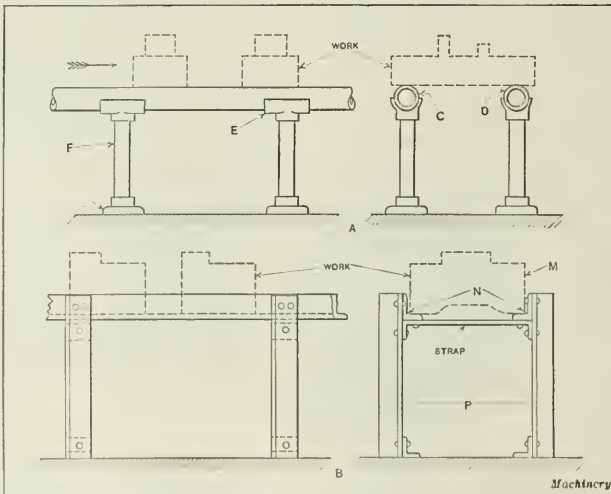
Two Simple Designs for a Plain Assembling Conveyor
